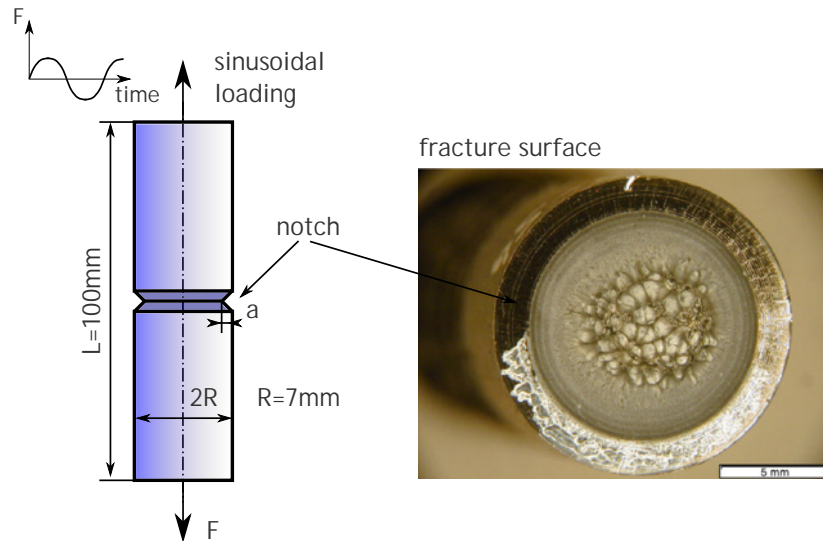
Typical CRB specimen geometry (left), striations on the brittle fracture surface of a CRB specimen of PE 100-D after fatigue loading [38] (right)
